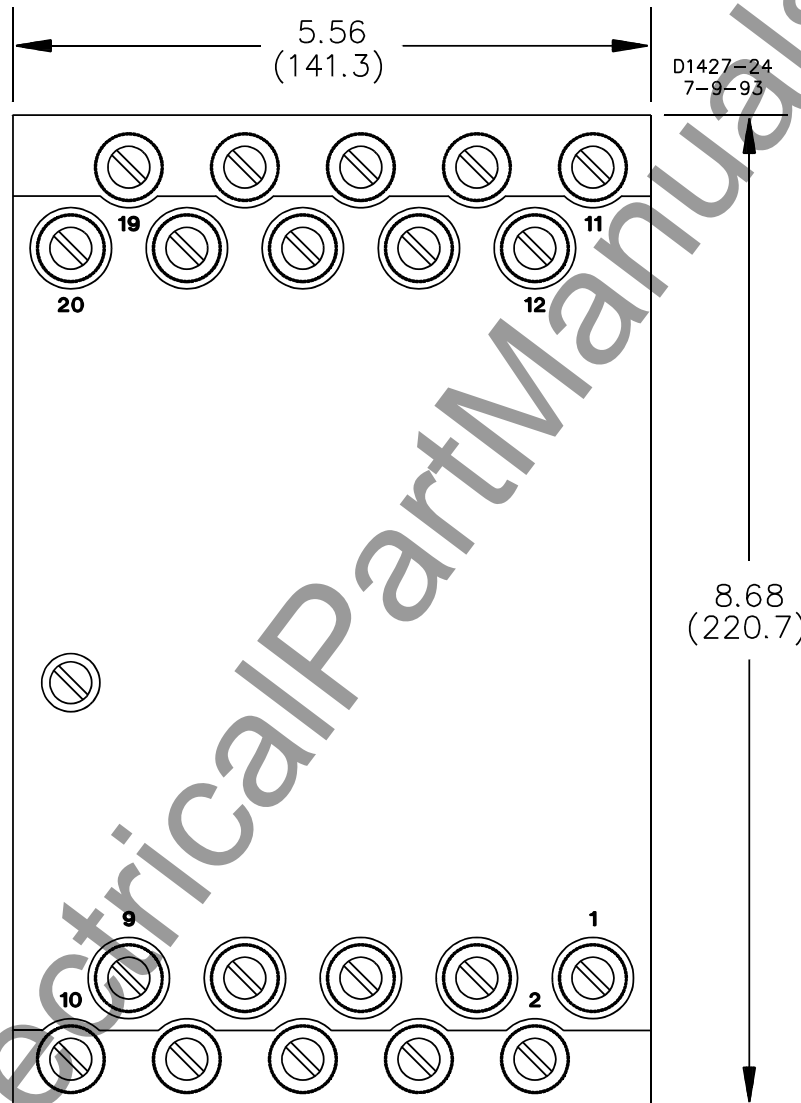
S1 Case, Double-Ended, Semi-Flush Mounting, Outline Dimensions, Rear View
